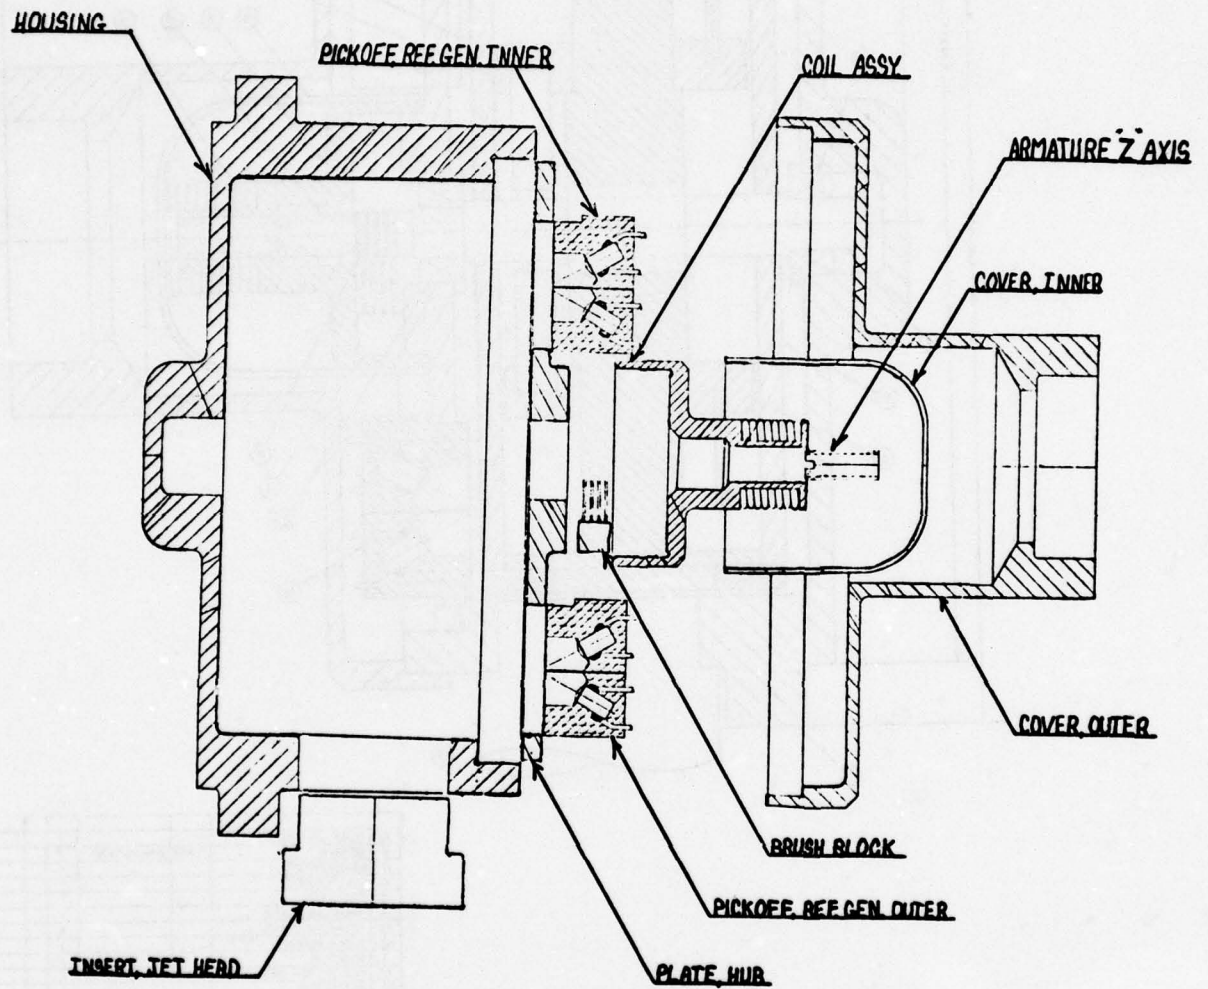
Multi-Sensor Housing Assembly Molded Configuration.
